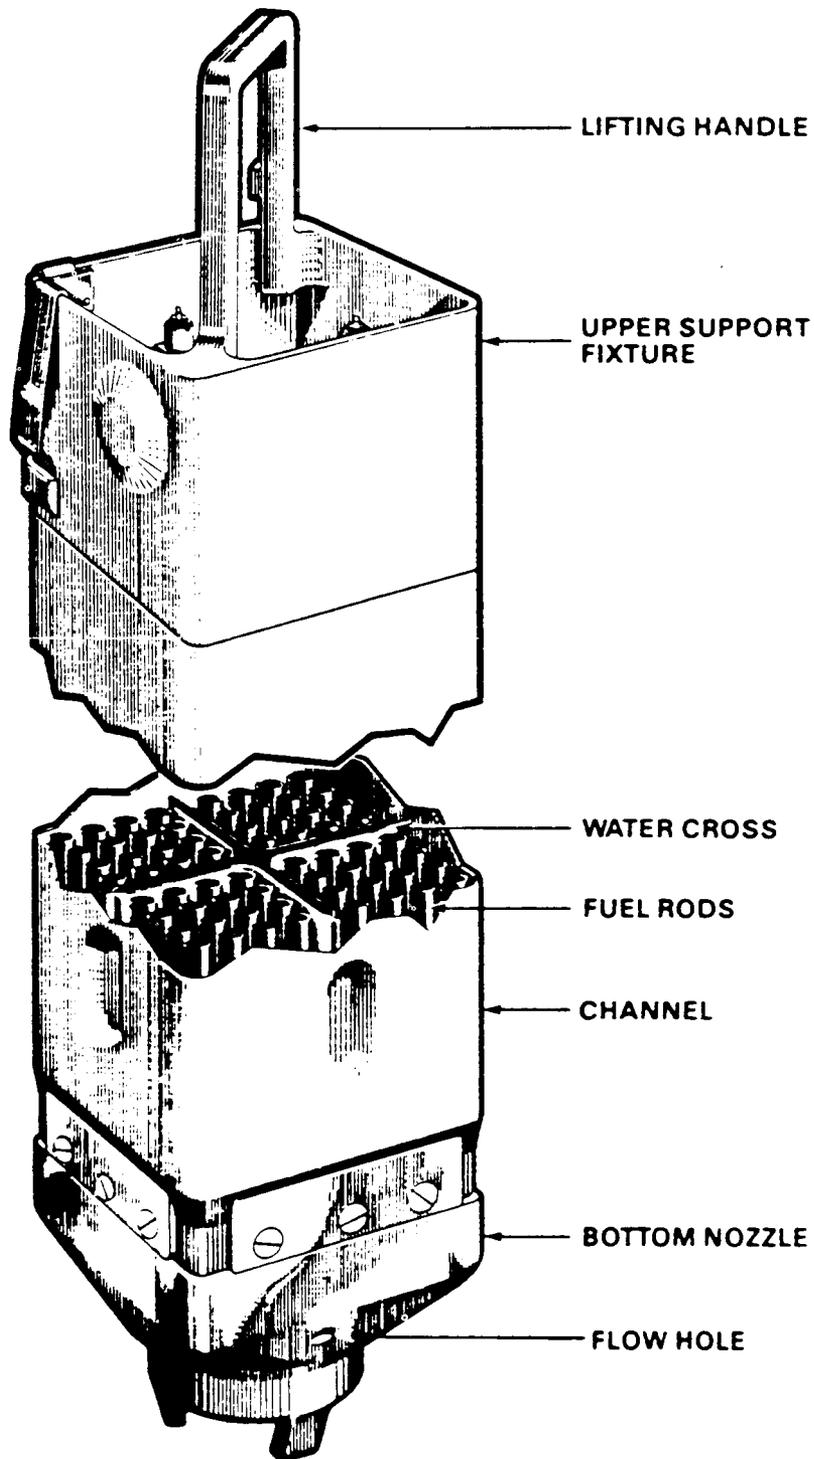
Cutaway diagram of a QUAD+ fuel assembly.
